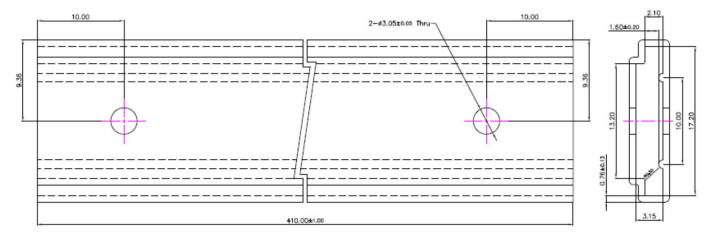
Package ray dimension for LUXEON CoB LHCI – xxxx - 1203.
